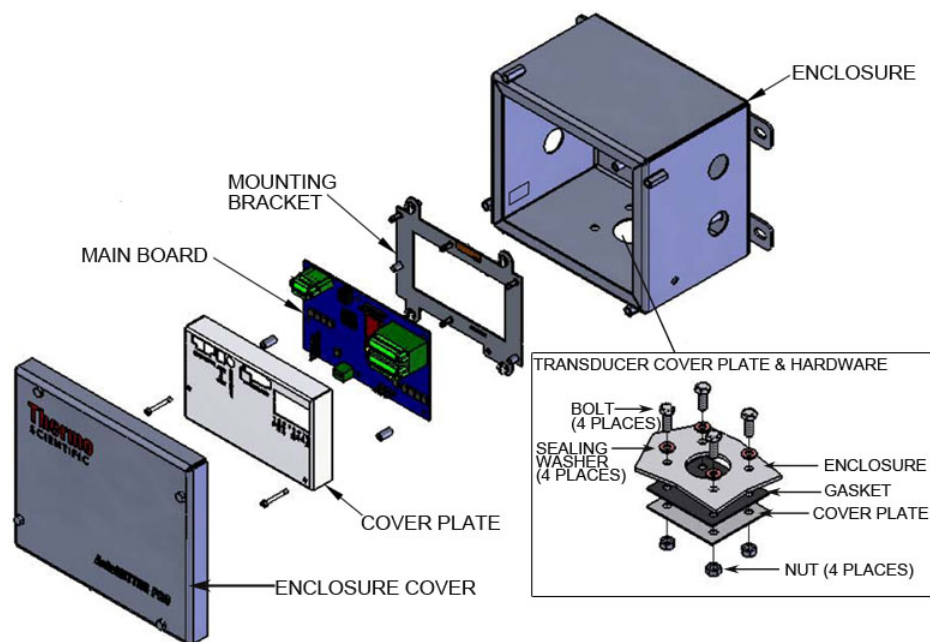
Direct mounting steps 1–3 (stainless steel enclosure shown)
